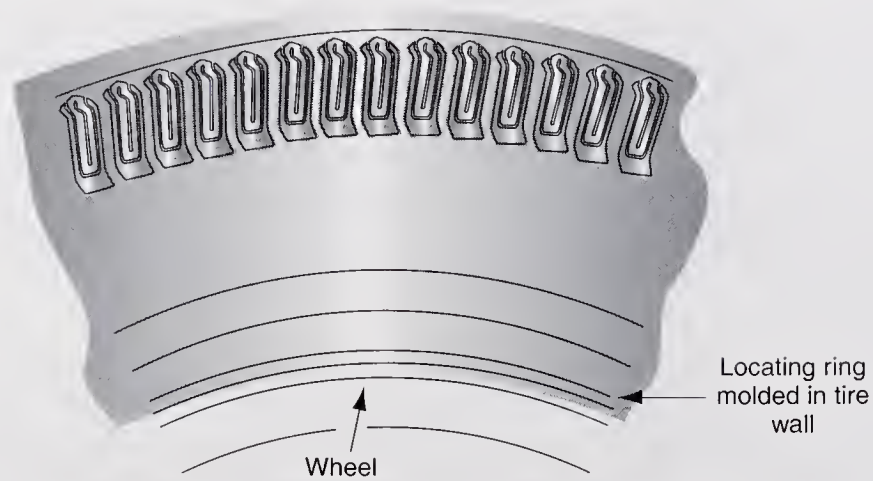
The circular ring around the tire bead must be centered on the wheel rim.
